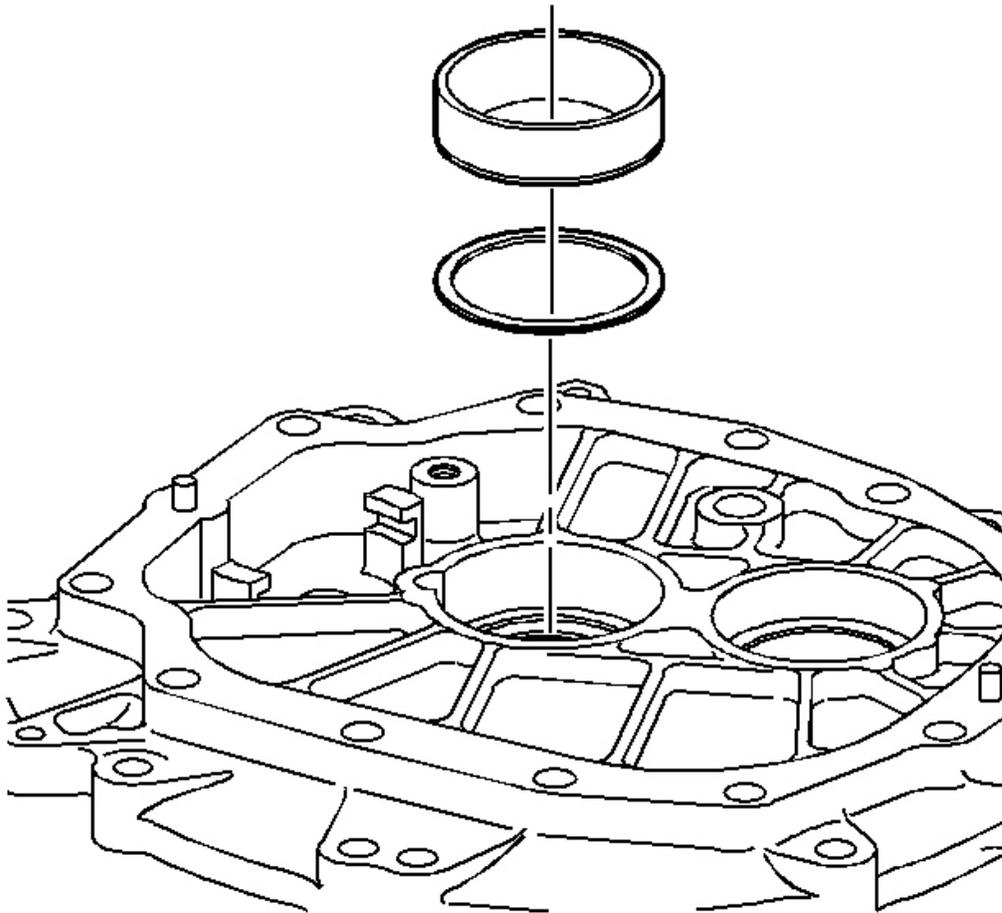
Installing/Removing Input Shaft Bearing Shim And Bearing Race
